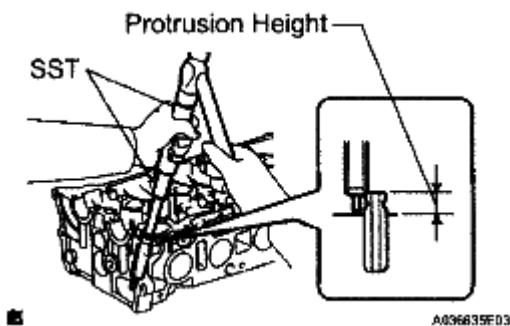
Identifying Guide Bush To Specified Protrusion Height
